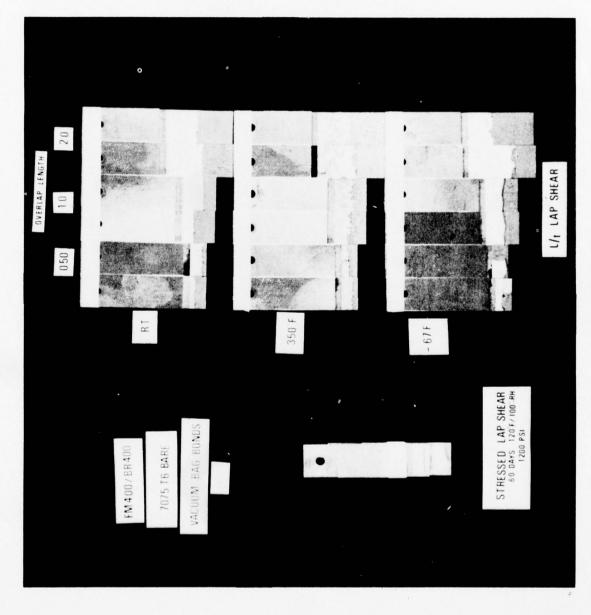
Specimen Failure Surfaces—FM 400, Non-Tank Anodized, Vacuum Bag Bonds
